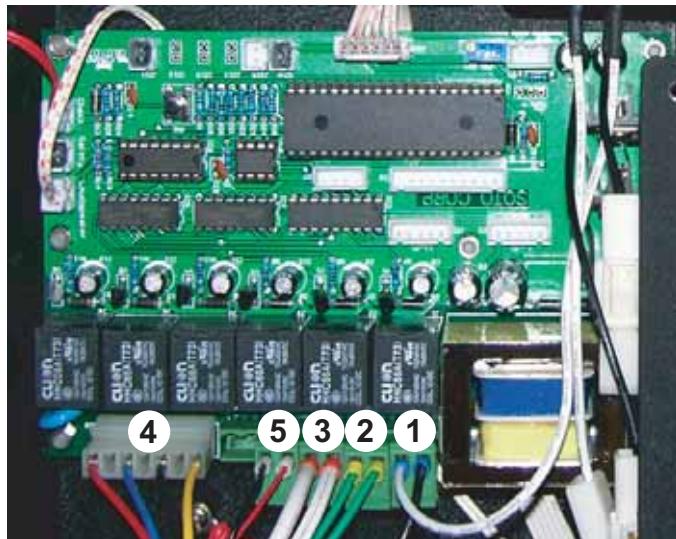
Plug the fan motor connection to the main circuit board and check the fuse. If the fuse is still blown out, you will need to check the fan motor capacitor and fan motor.
